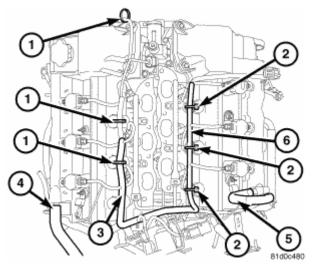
Identifying 2.7L Engine Wiring Harness Courtesy of CHRYSLER LLC
